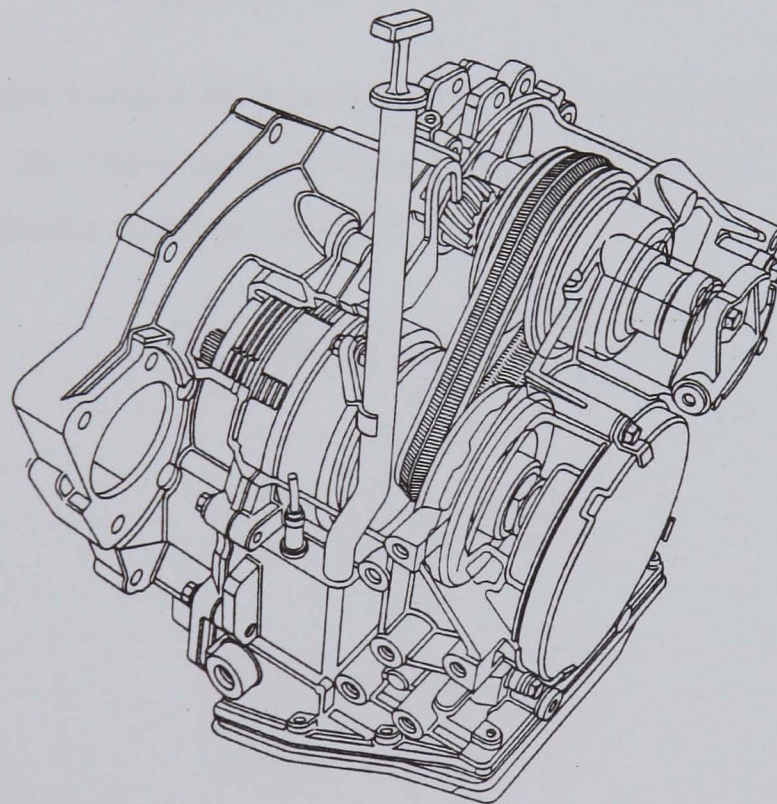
Cutaway Drawing of a Push-Belt CVT
